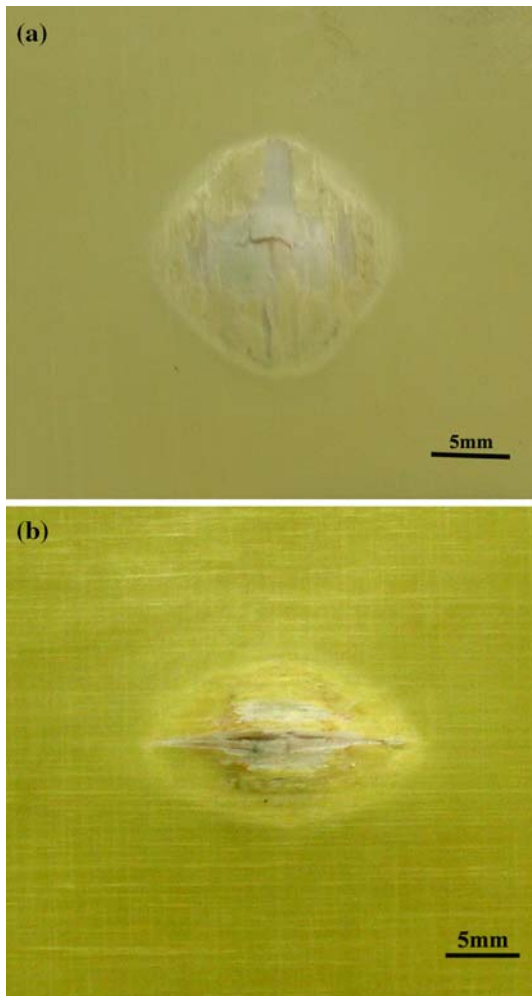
Impact damage zone at 21.8 J after removal of outer aluminum layers (a) GLARE5-2/1; (b) GLARE4-3/2
